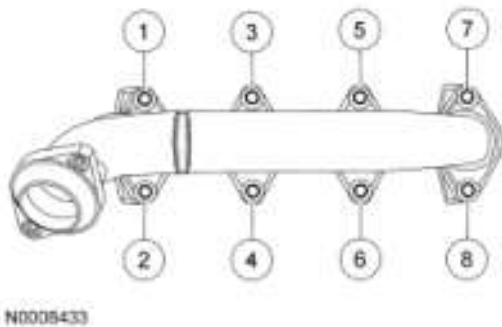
Identifying Tightening Sequence Of RH Exhaust Manifold Bolts
